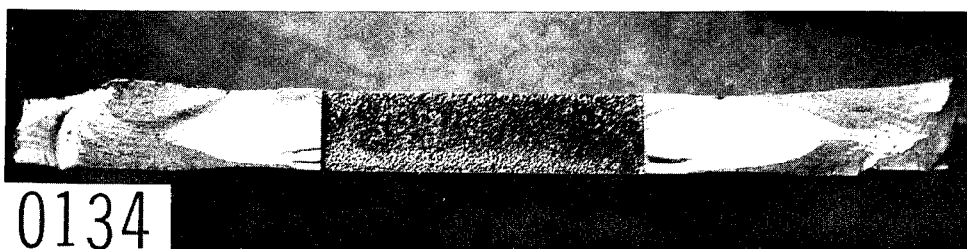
WR fatigue crack and monotonic fracture in a center-cracked crack toughness specimen of Ti-4Al-3Mo-1V. 6X.
